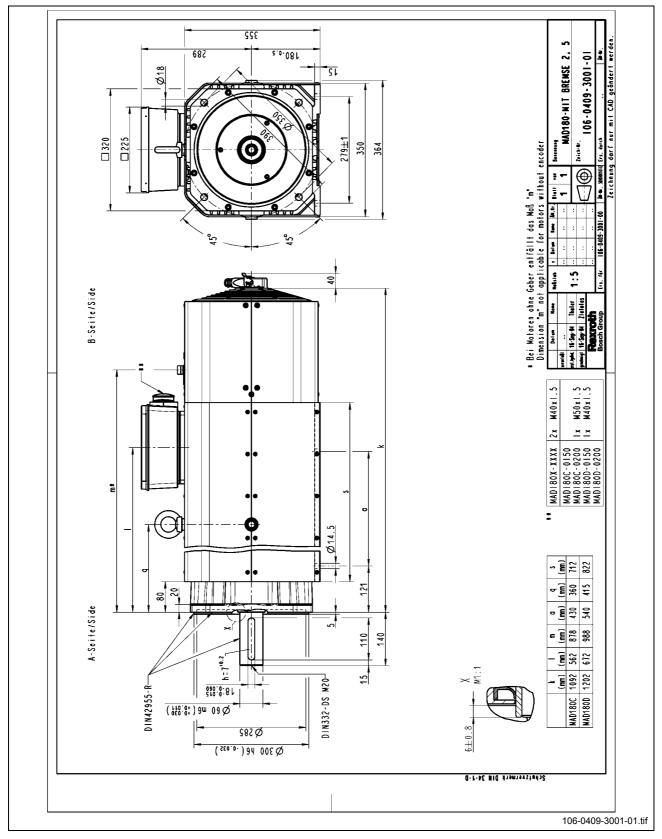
Dimension sheet for MAD180, with brakes 2 and 5
